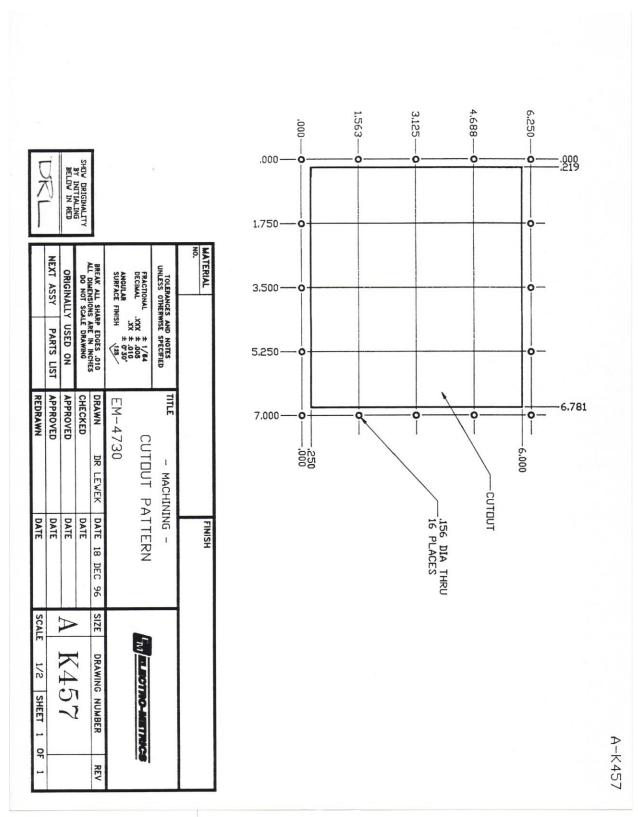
EM-4730 Bulkhead Filter Cutout Pattern
